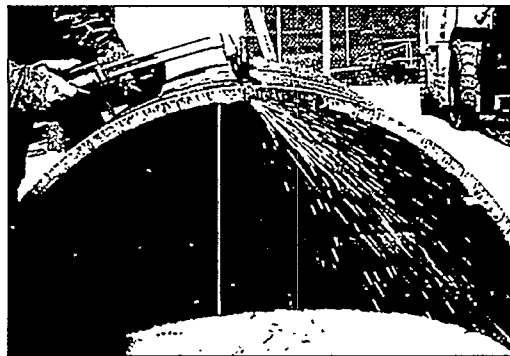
Oxy-gasoline torch cutting a 1" thick steel tank.
